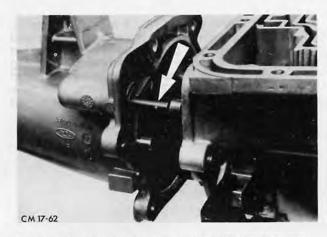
Fit extension housing paying attention to correct seating of parking pawl actuating rod
